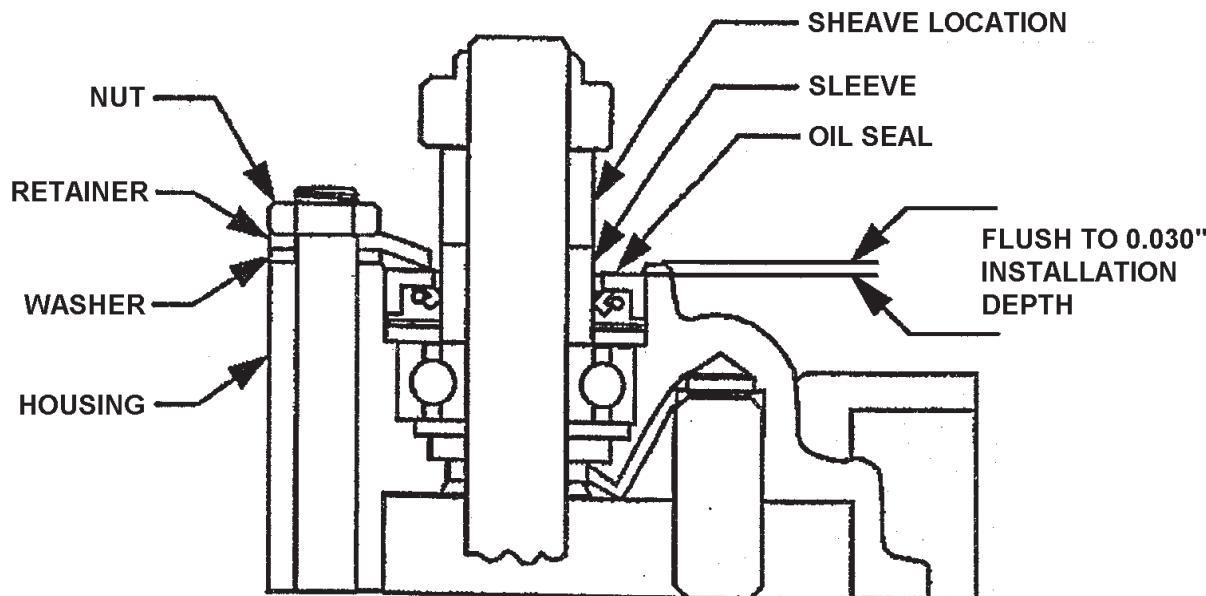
Starter w/Accessory Drive Adapter Oil Seal Position
